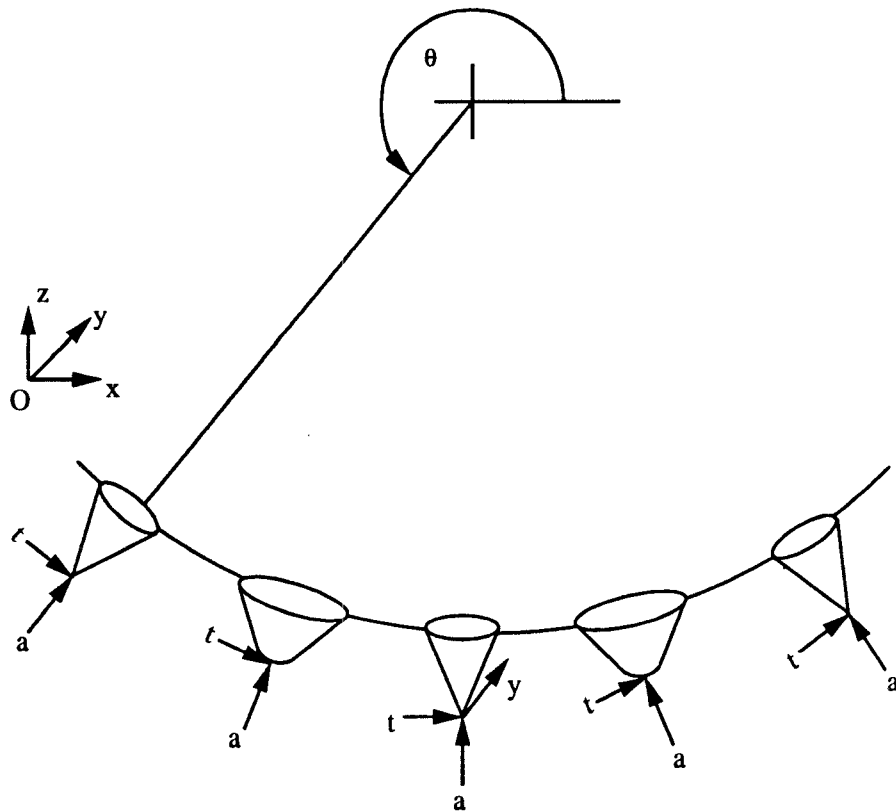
Enlarged View of the Workpiece - Grinding Wheel Contact Region
